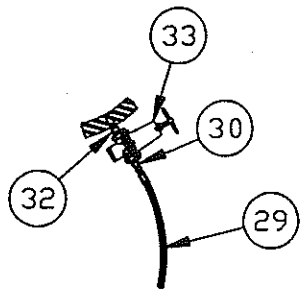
HYDRAULIC TANK ASSEMBLY - CONTINUED
